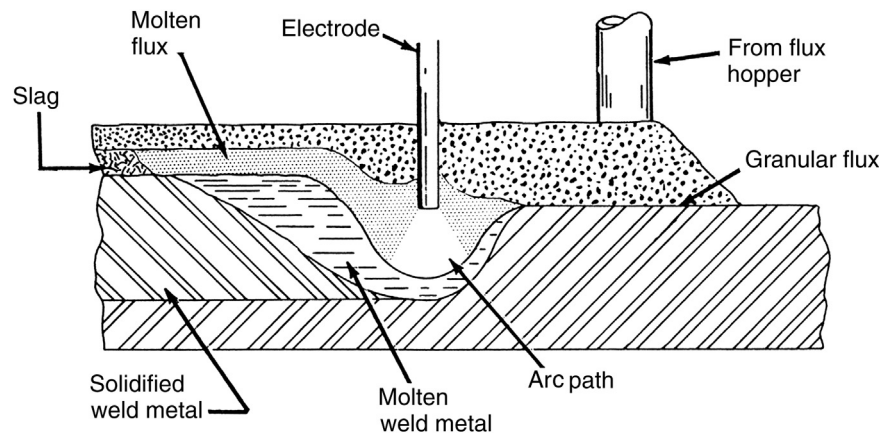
Submerged arc welding (SAW). The weld is produced by heating with an arc between a bare metal electrode and the work. The arc is shielded by a blanket of granular, fusible material on the work. The diagram is used by permission courtesy of Hobart Brothers Company. Technical Section. In *Pocket Welding Guide*, Troy, OH, 1997, pp 108–138.
